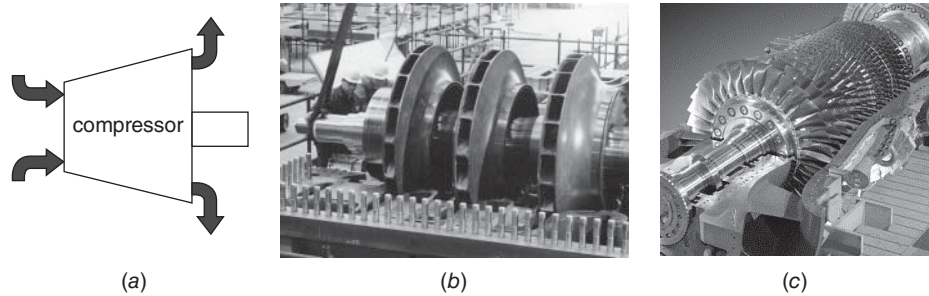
Diagram and photos of centrifugal compressor rotor and axial compressor during assembly. Courtesy of General Electric © GE.
